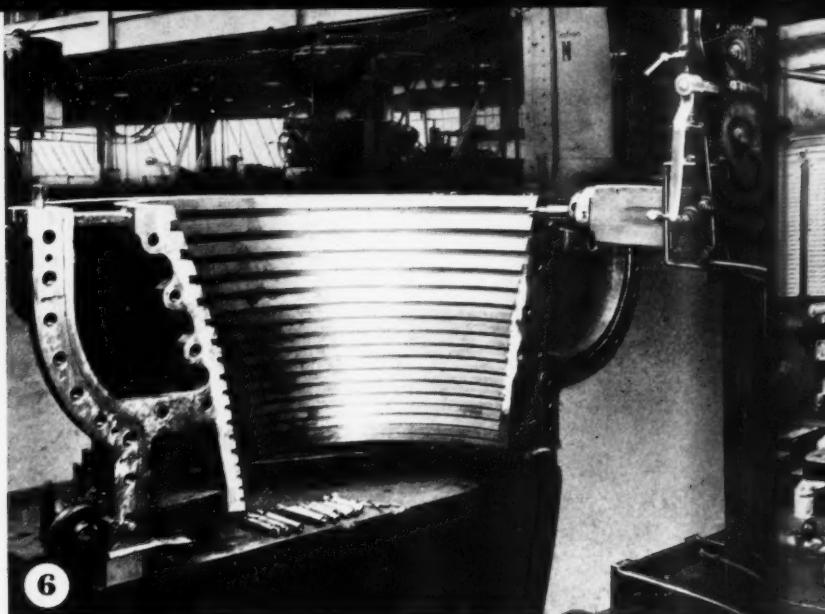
Draw-cut Shaper Used for End-milling, Drilling, and Reaming Operations on a Turbine Casing
